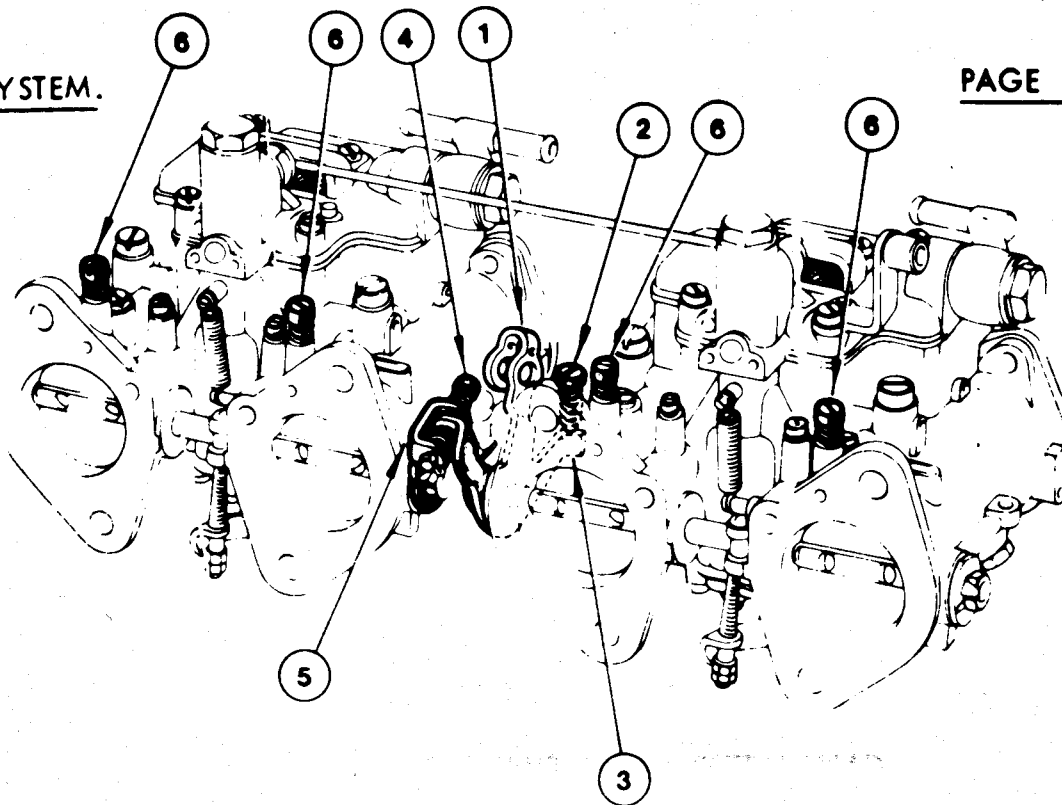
CARBURETTER ADJUSTING SCREWS.
